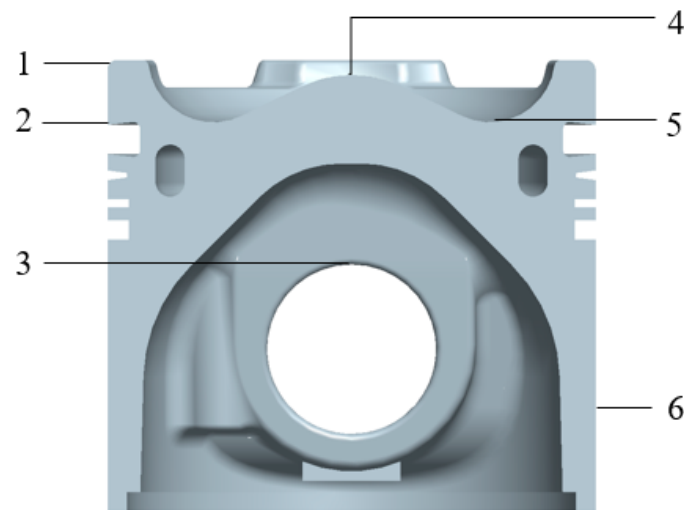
Measurement points for the piston temperature measurement. (1-valve pocket, 2-upper edge of the first ring, 3-upper edge of the pin hole, 4-center, 5-combustion chamber cavity, 6-skirt).
